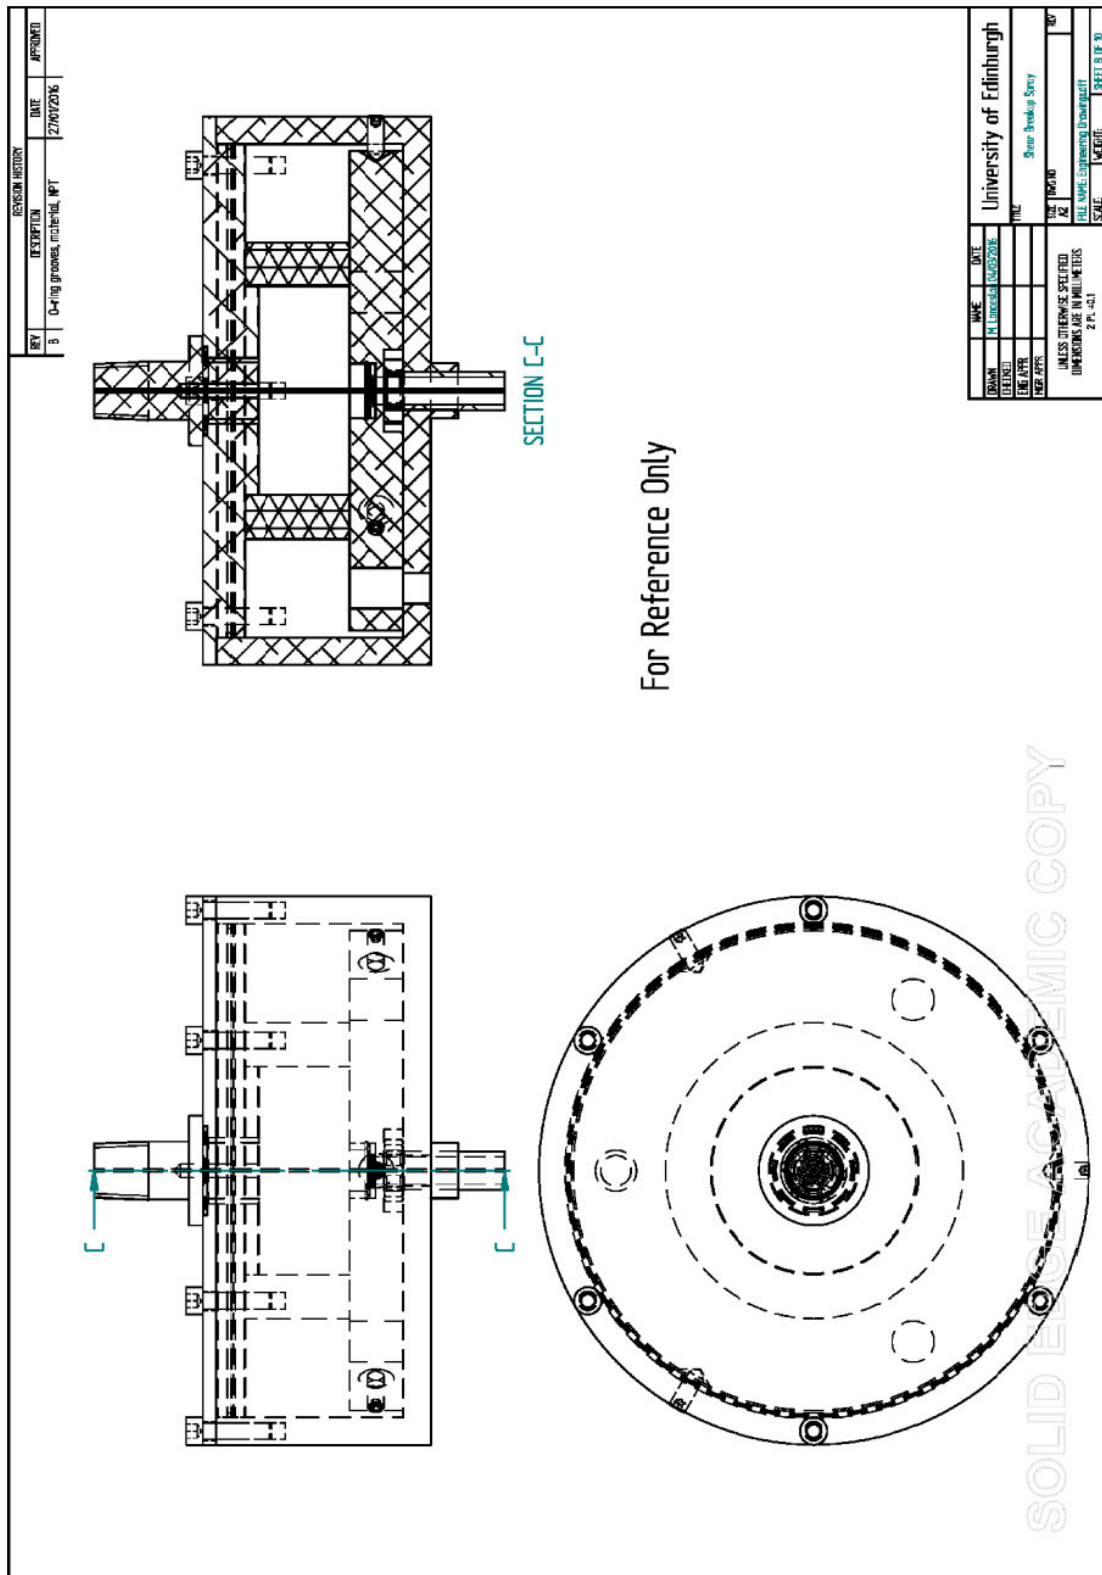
Assembled view (Langeslag & Linne, 2016).
